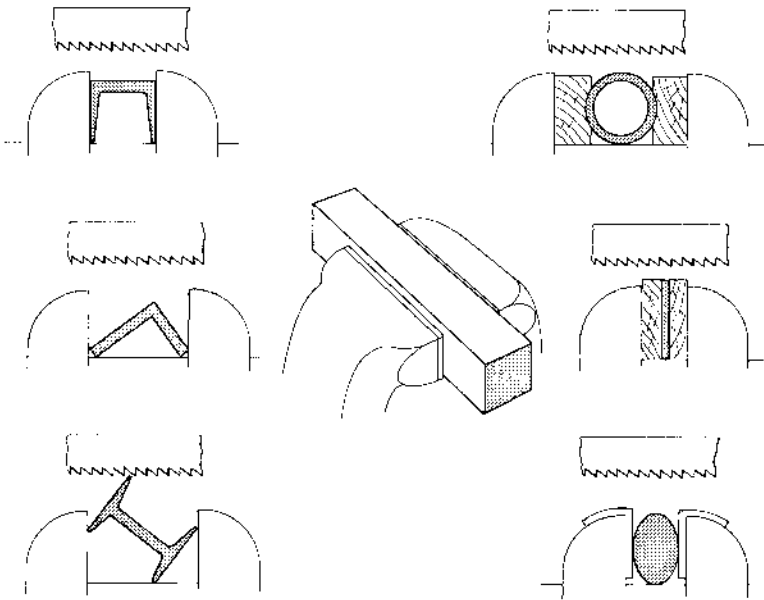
Holding work to be cut. (Courtesy Disston, Inc.)
